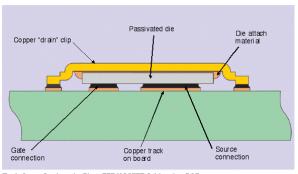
Cross-Section of a DirectFET MOSFET Soldered to PCB
